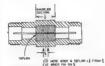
UG298/U Type N Connector showing the position of cuts to make two end adaptors
